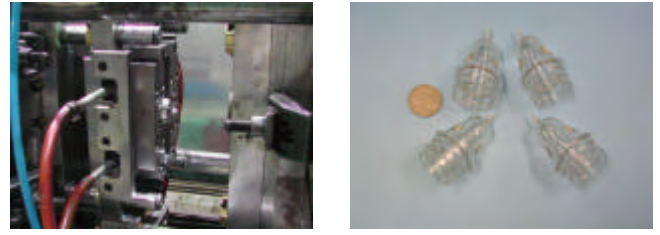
Photo of (a)perform mold and (b)injection molded part
